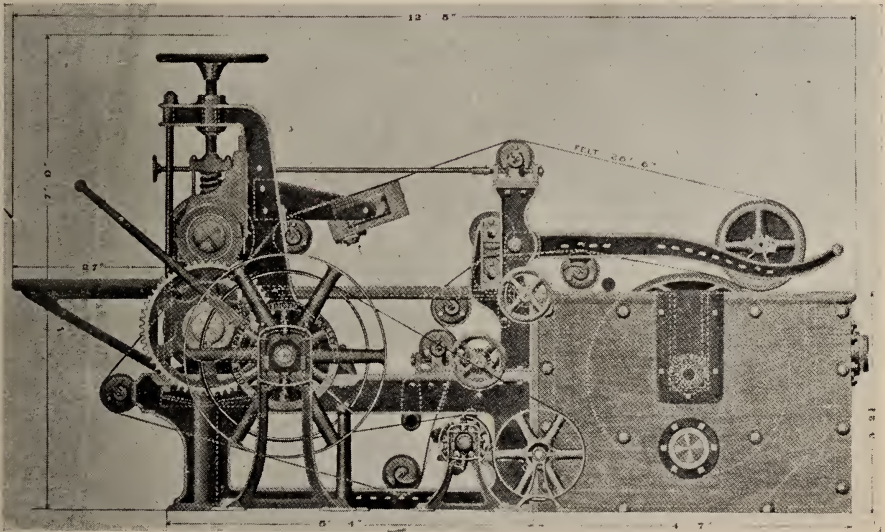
Wet Machine, Waterous Engine Works. Co.
